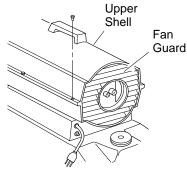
Upper Shell Removal, 35/55,000 BTU/Hr Models
